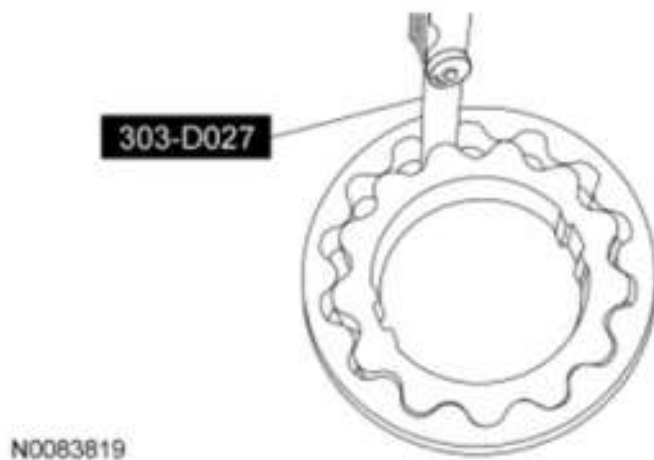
Measuring Clearance Between Outer Rotor And Inner Rotor
